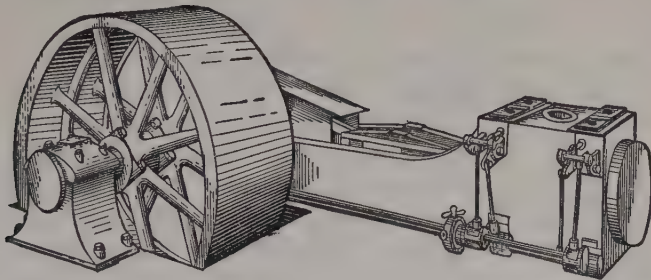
Medium-speed Engine—Shaft Governor—Positive Cut-off.
